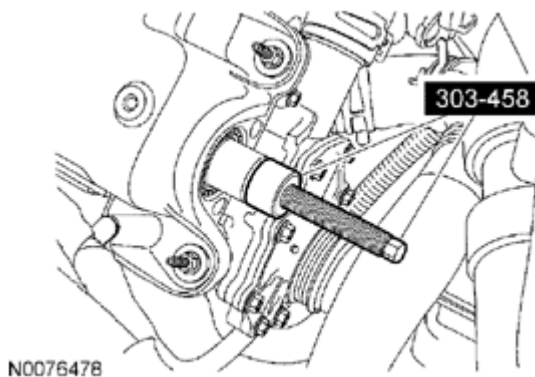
Installing Camshaft Pulley Installer In Camshaft
